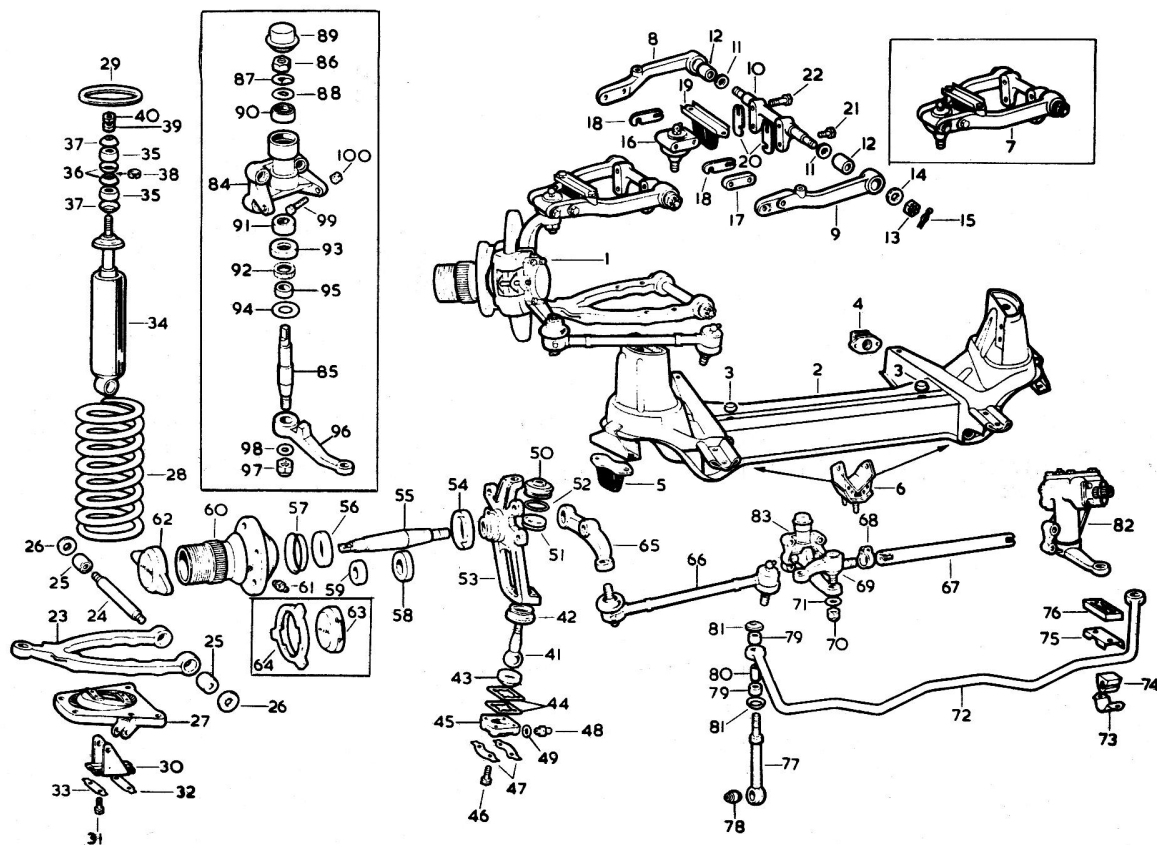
FRONT SUSPENSION ASSEMBLY
